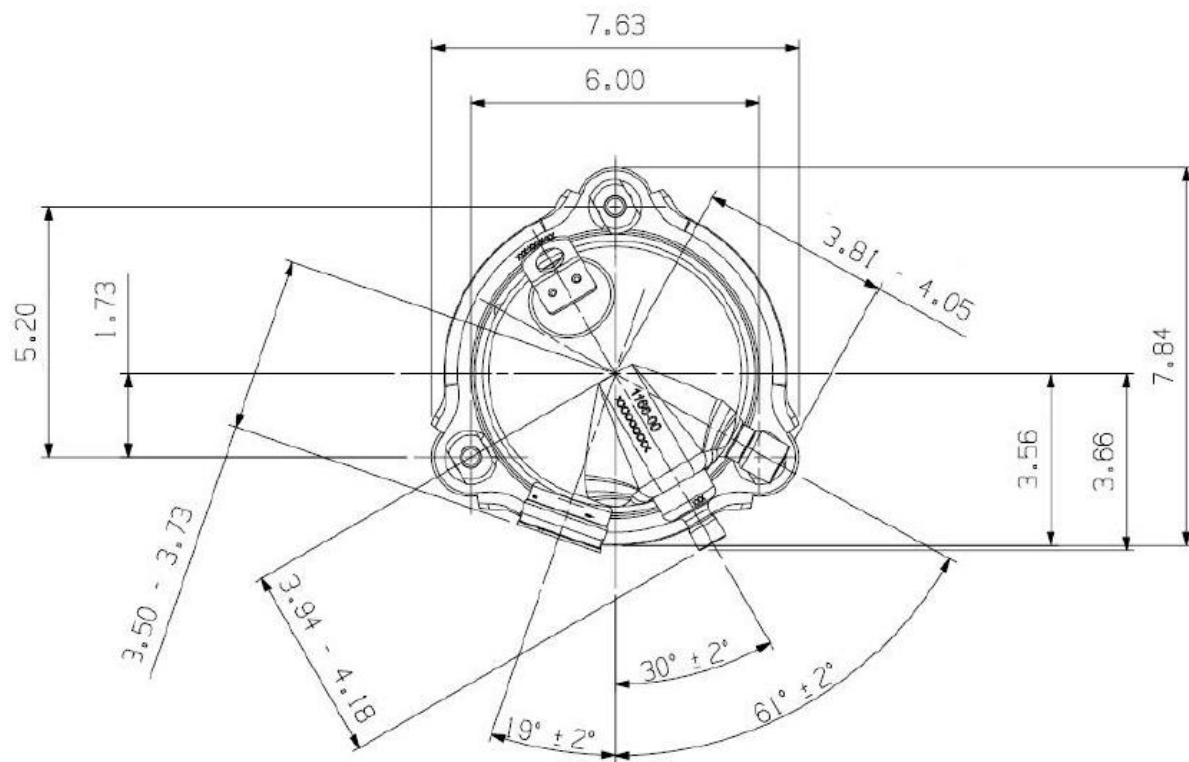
Dimensions of ZB\*KAU compressors , upper view
